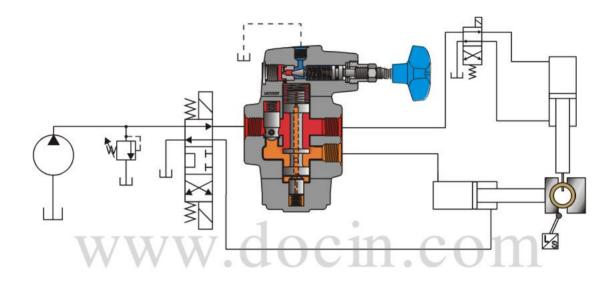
Pilot operated pressure reducing valve regulating in a clamp circuit
